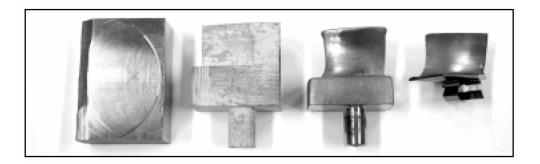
Overview over the manufacturing steps of a high pressure compressor blade out of extruded bar
